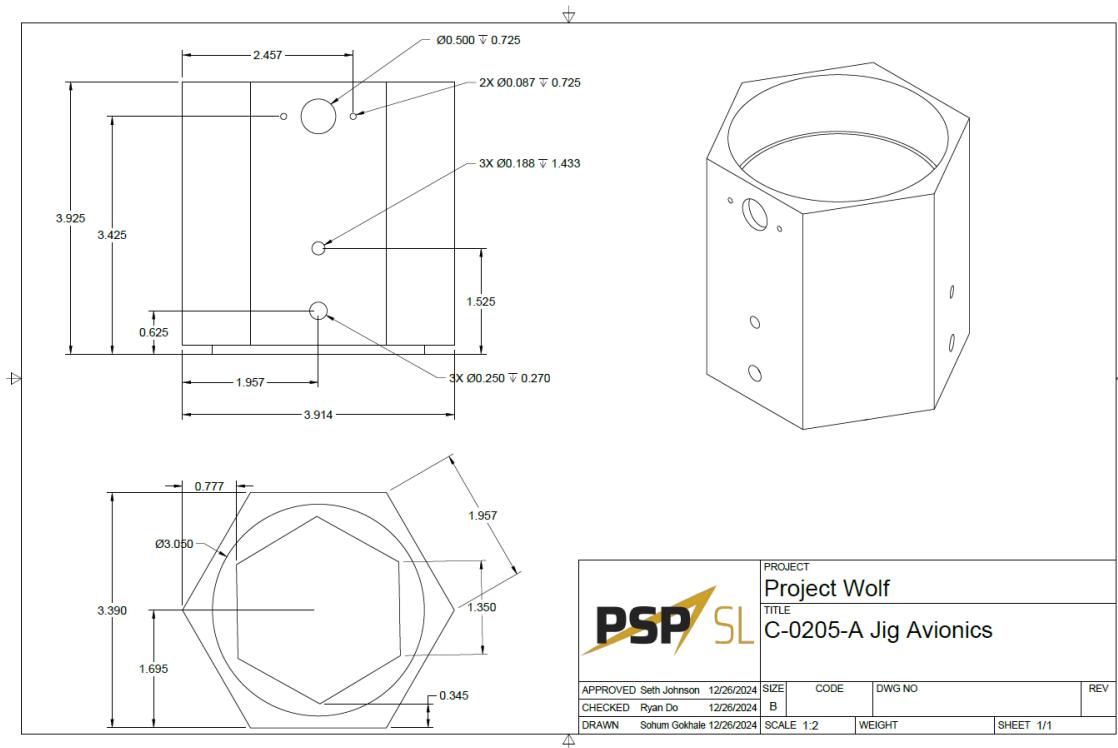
Subscale Avionics Coupler Jig Technical Drawing
